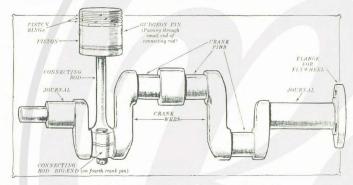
Two-bearing Crankshaft with One Connecting Rod and Piston in Place,
